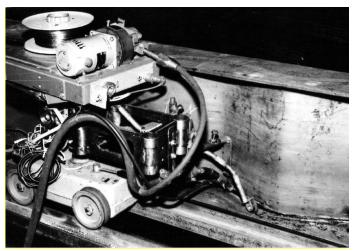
1985. Serial Welding Tractor with a Device for Welding Flanges of Beams with Corrugated Webs.
